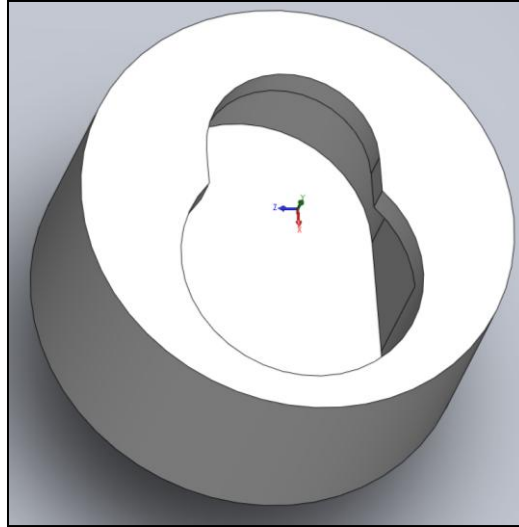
This image shows a completed vertical track using the fabrication process described above.
